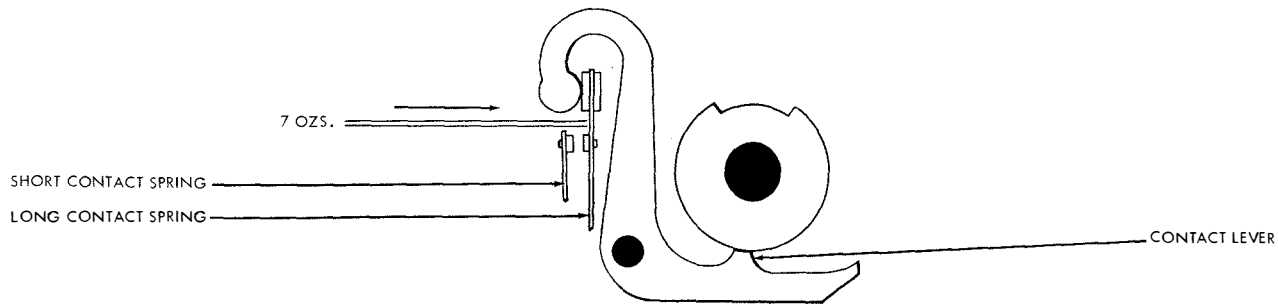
Transmitting Contact Spring - Long (Preliminary)
